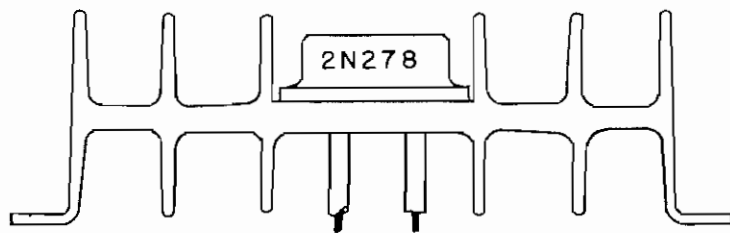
PARTS LAYOUT - TOP VIEW - 987730 - RADIO
